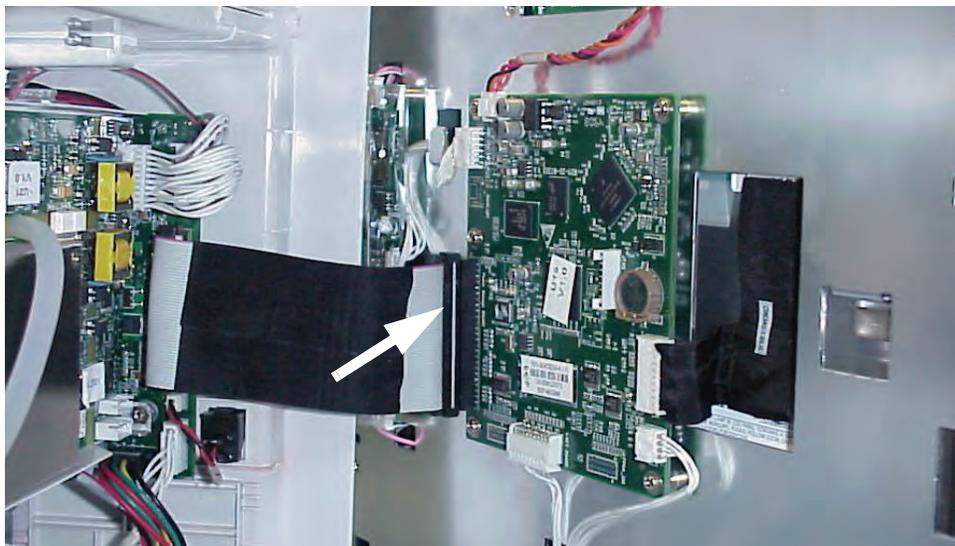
Disconnect the ribbon cable from the front housing assembly
